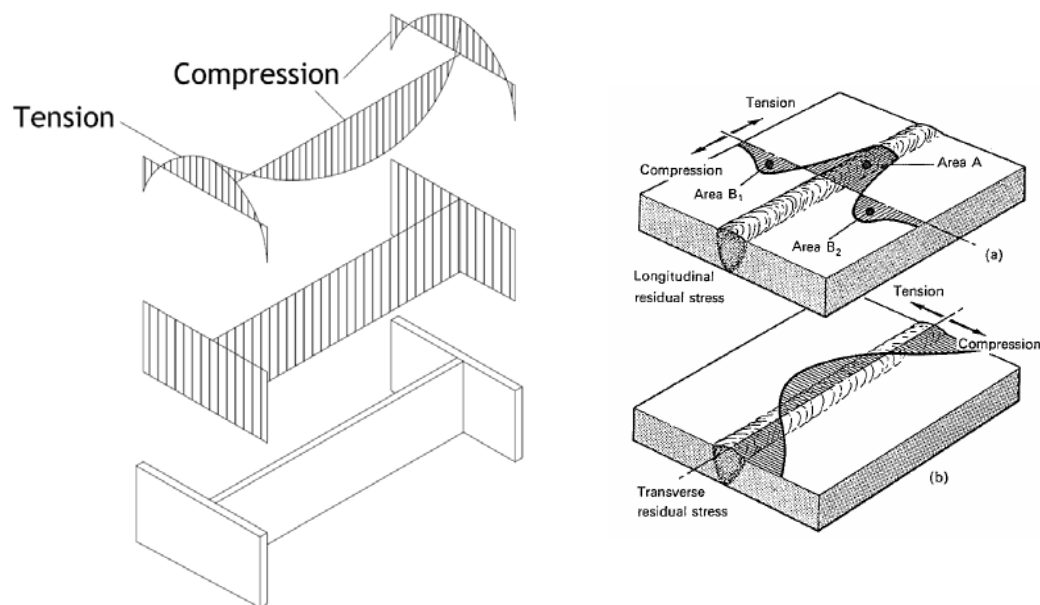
The residual stresses in a hot rolled element (left) and due to welding (right) [4].
